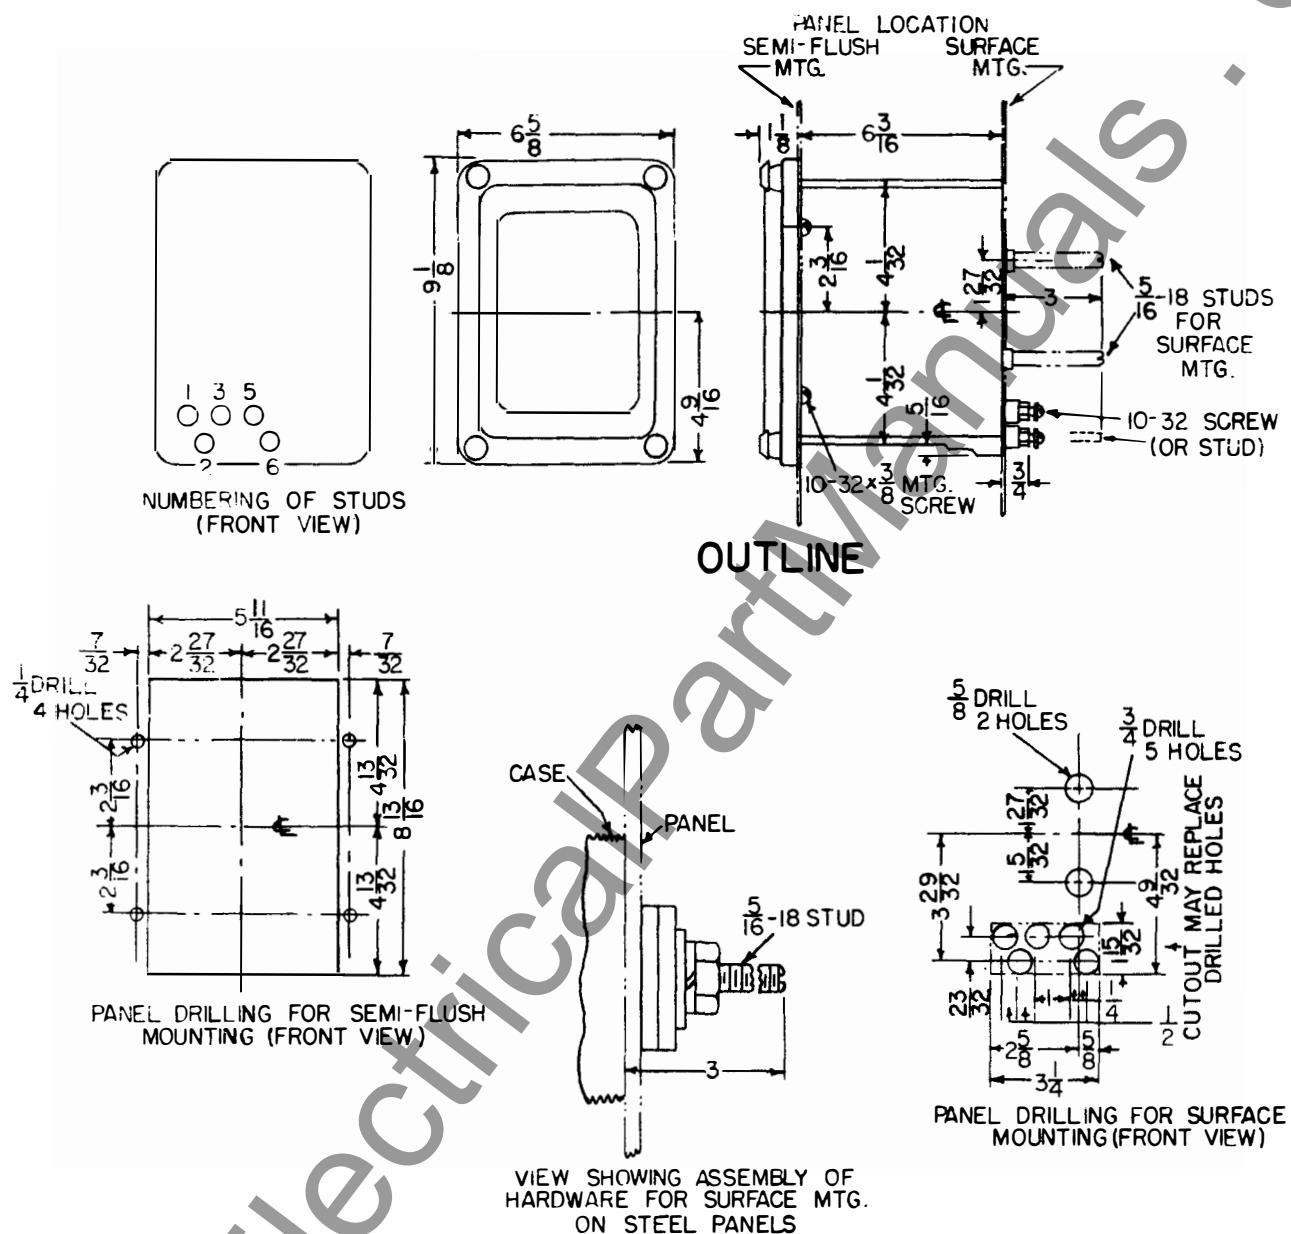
(6209270-2) Outline and Panel Drilling Dimensions for the Type IJC51C Relay
